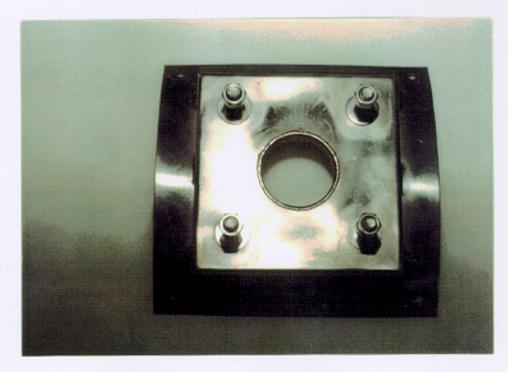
Task 2: Test #6 / #10, Pre - test showing double plastic bag / gasket assembly (folded).
